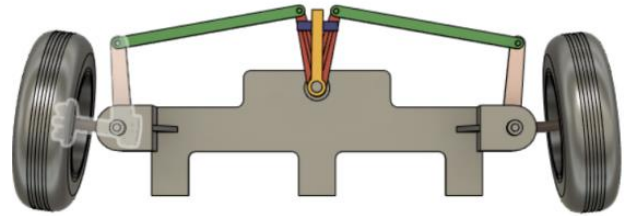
illustrates a top view of the toe adjustment mechanism depicting steering in neutral position with the wheel in the toe-in position
